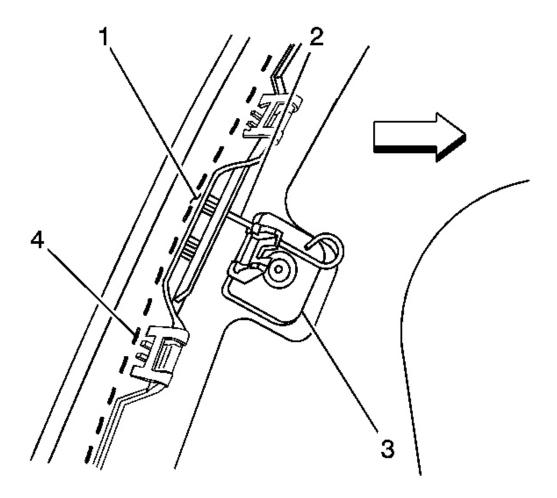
Locating Window Bracket & Window Frame Courtesy of GENERAL MOTORS CORP.
